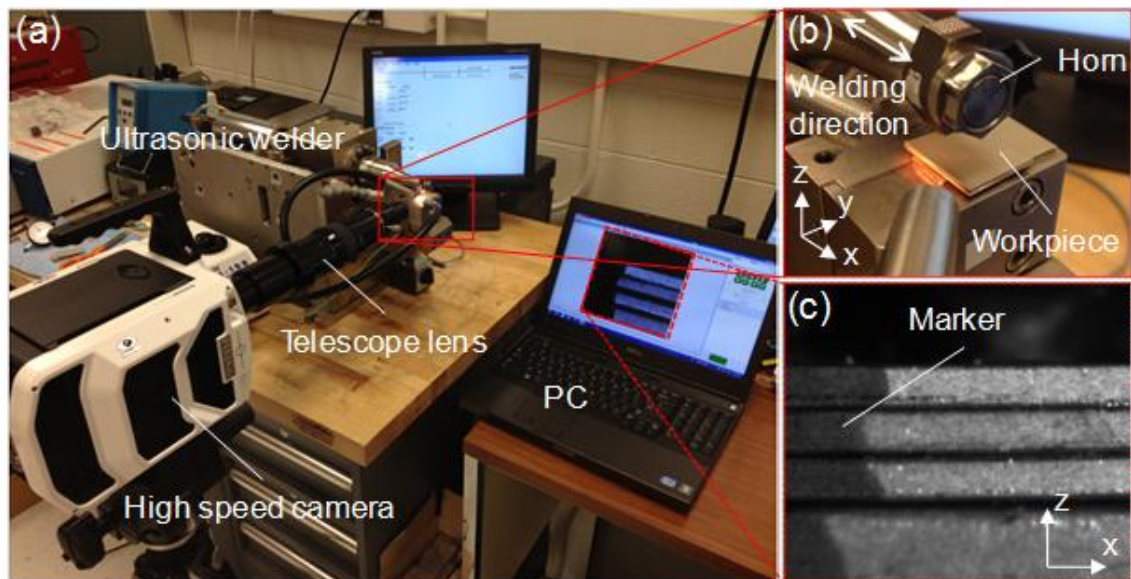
High-speed camera setup: (a) entire view of setup; (b) focused view on welding part; and (c) workpiece in PC screen view
